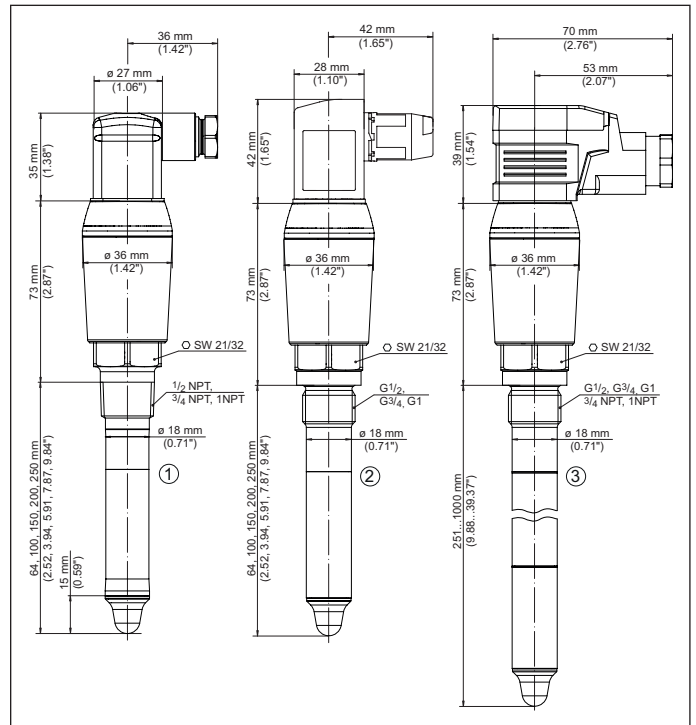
VEGAPOINT 23, standard version - thread with valve plugs acc. to ISO 4400
